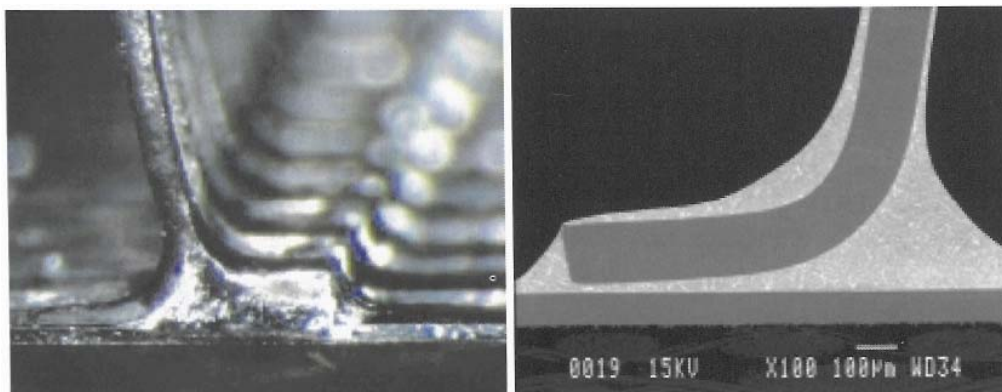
Appearance of as received solder joints before thermal cycling (left), and an SEM photograph of a microsectioned solder joint (right)
